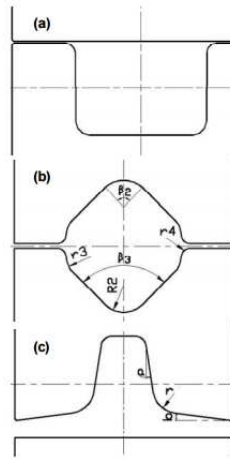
Cross sections of the roll forming dies, showing groove geometry. (a) Traditional, (b) Proposed, and (c) Hat groove geometry [32]
